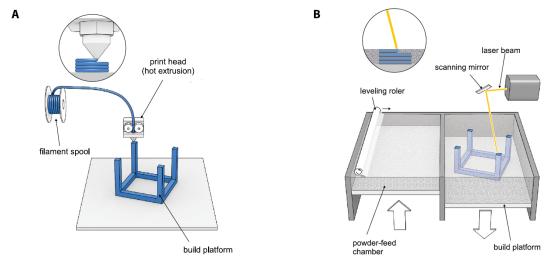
The two 3D-print technologies that are used to manufacture the prototypes. (a) Fused Deposition Modeling (FMD); (b) Selective Laser Sintering (SLS) [55].
